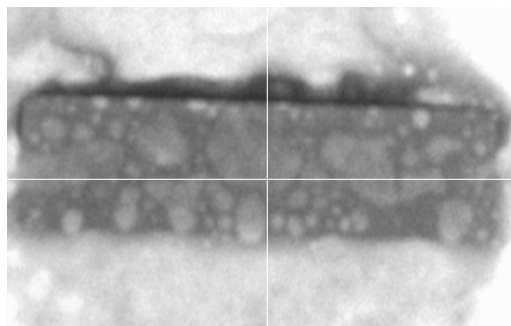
X-Ray Result of Passive Component Attach with AuSn Paste
